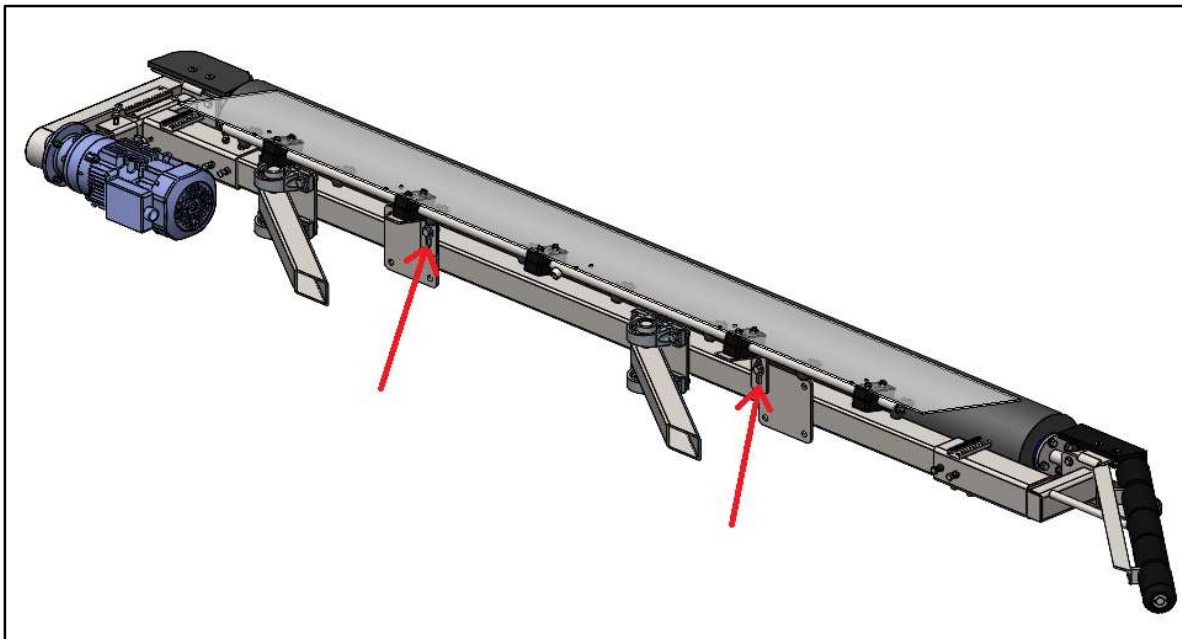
Locations of the two bolts to be removed from the existing Tire Shine assembly.
